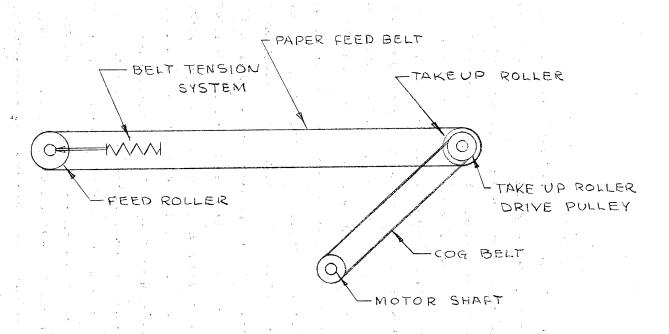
COG BELT DRIVE FOR PAPER FEED BELT ROLLERS
